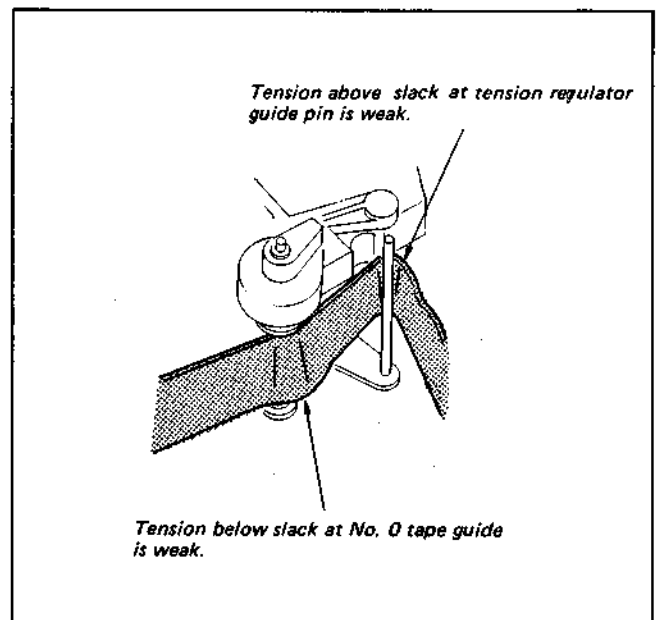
Replacement and adjustment (3) of tension regulator arm plate assembly
